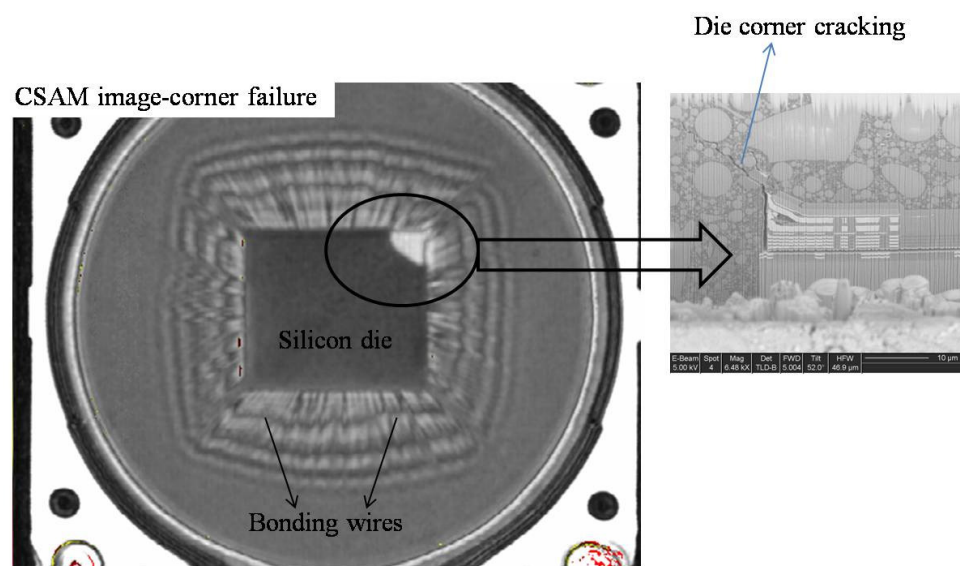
Package cracking failure after TC 600 cycles (die corner delamination)
